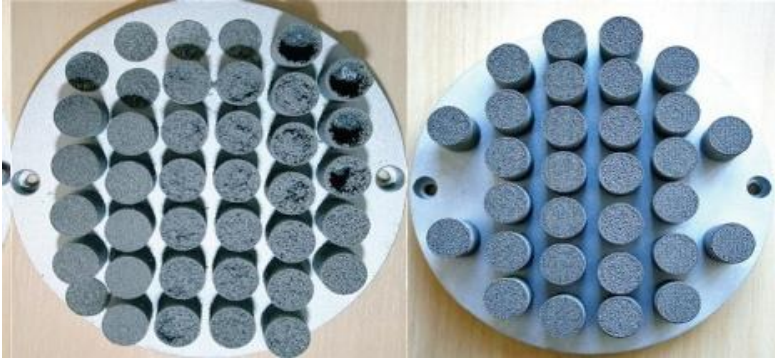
Preliminary Laser Parameter Build Plate and Optimised Laser Parameter Build Plate Examples
